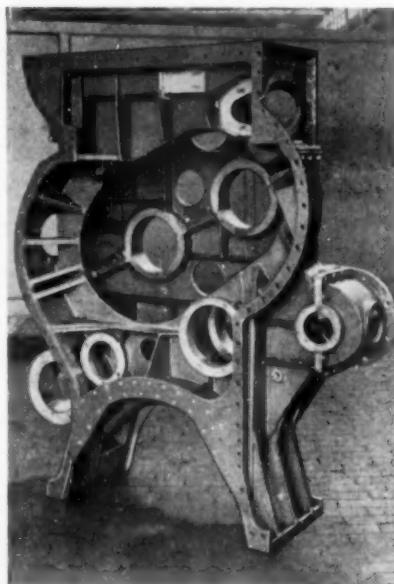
Gear casing and end housing assembly fabricated by arc welding at lower cost than would have been possible with conventional casting.
